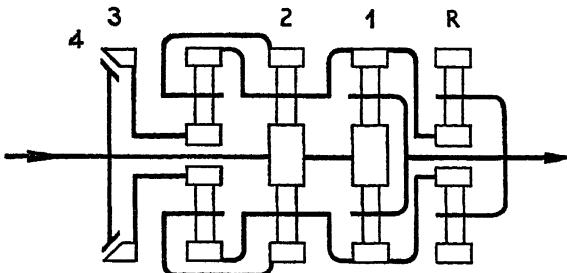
Method of Locking the Gears to Produce the Direct Drive.
